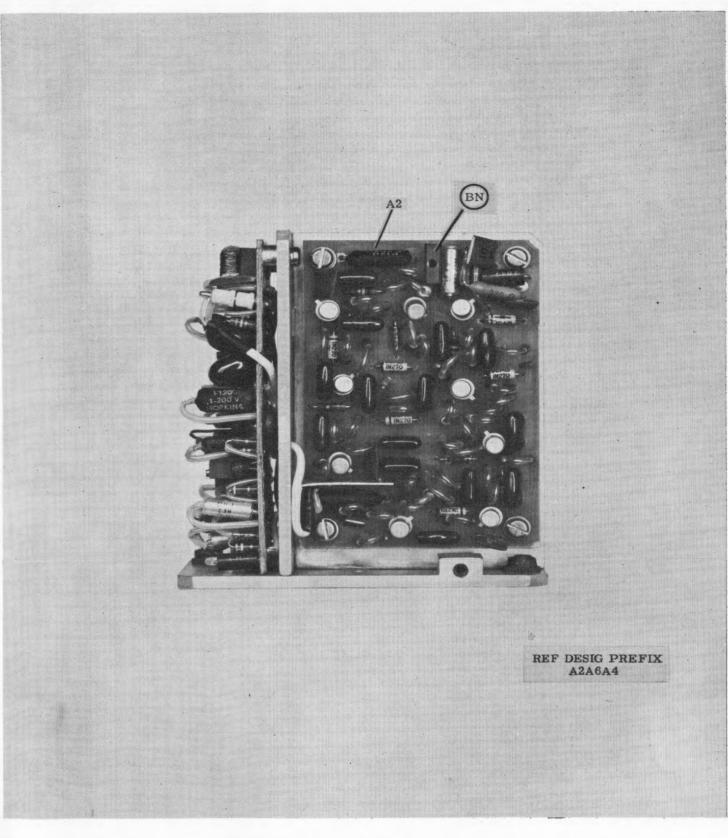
500 CPS Synthesizer Electronic Subassembly, Right Side, Component and Test Point Location
